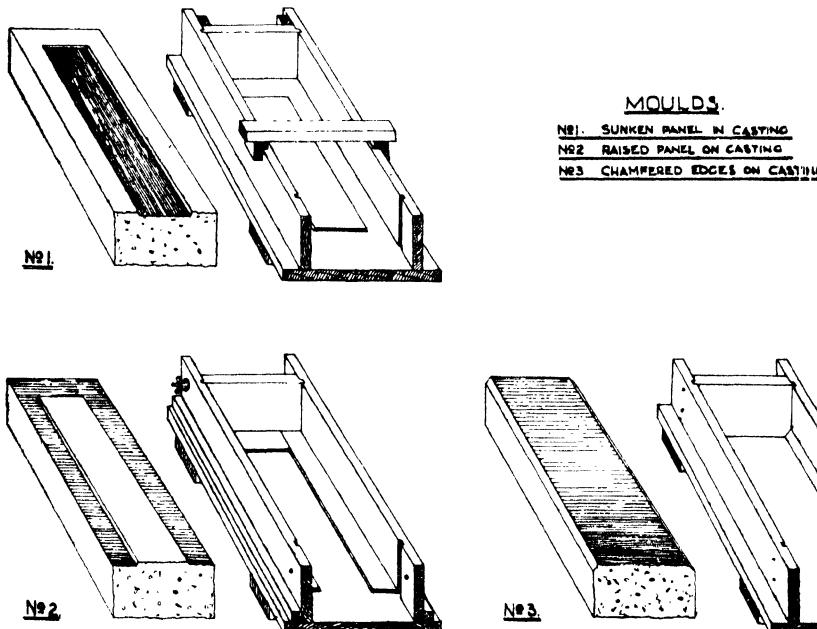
MOULDS FOR MAKING CASTINGS WITH PANELS AND CHAMFERED EDGES
